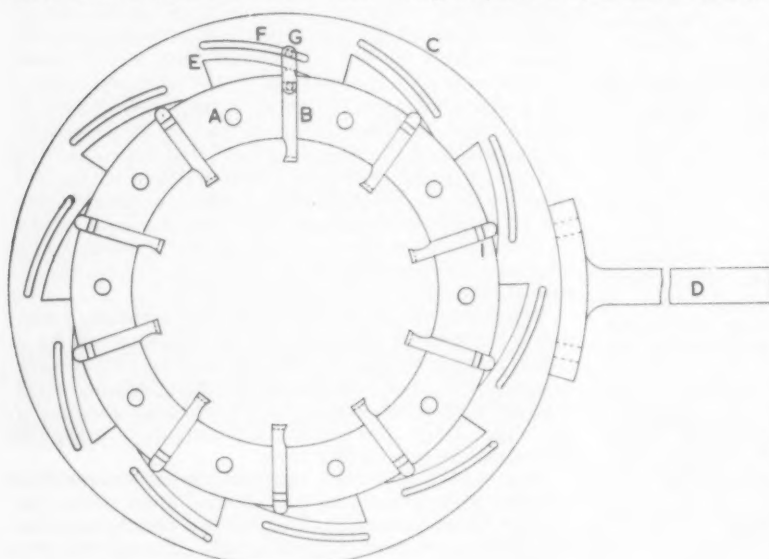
Front elevation of quick change chaserhead with keep plate removed, showing, at top, link G in engagement with chaser B and scroll F
